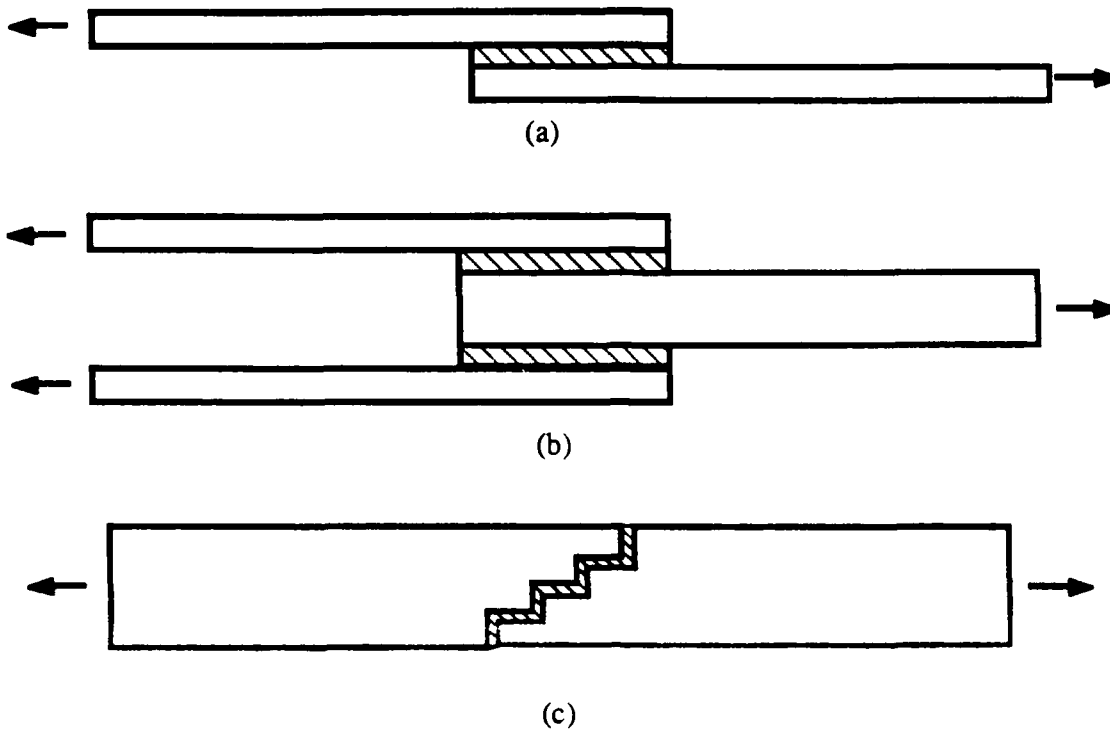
(a) Single-lap joint, (b) double-lap joint and (c) stepped-lap joint.
